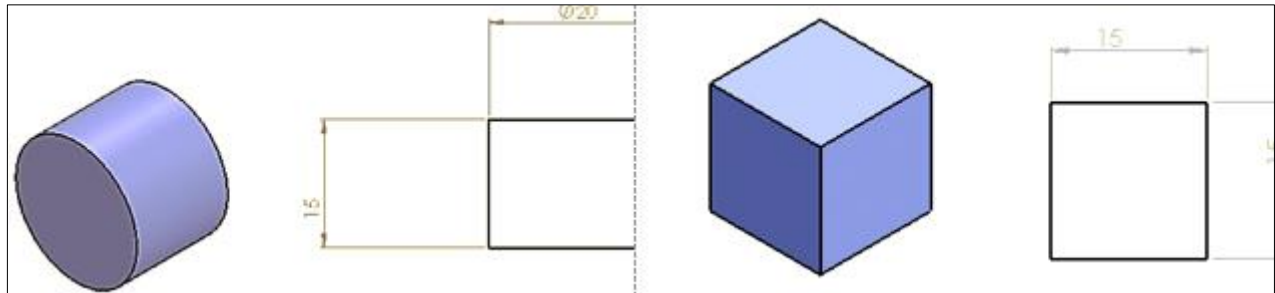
Compression test specimens: a) cylindrical sample; b) cubic sample
